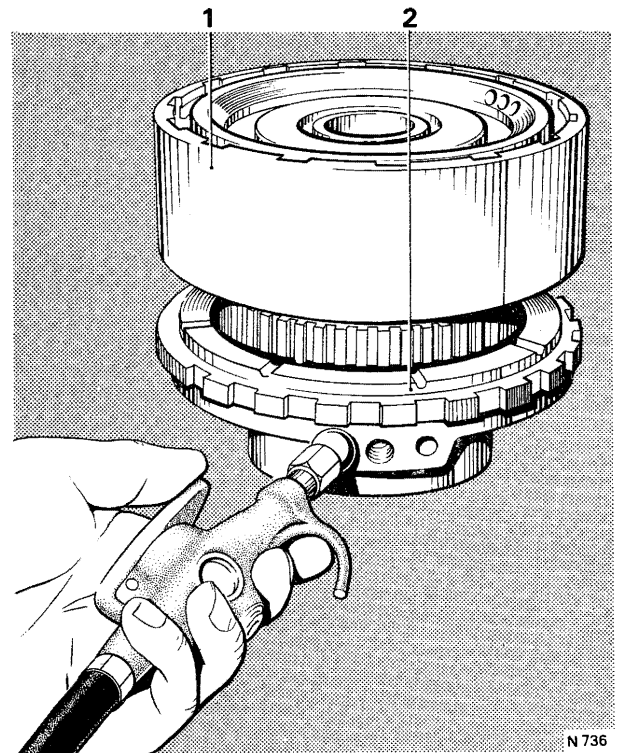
AIR TESTING THE DIRECT CLUTCH
